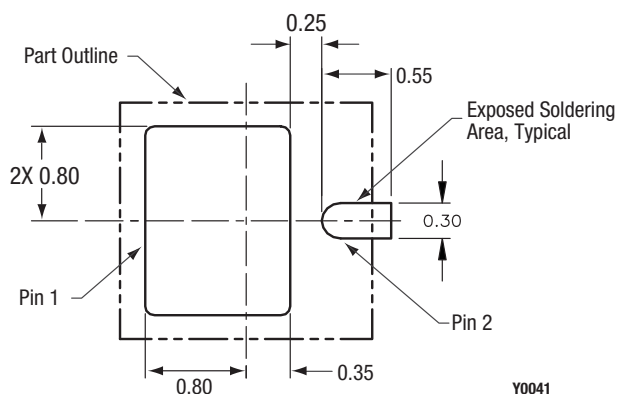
SMP1334-084LF PCB Layout Footprint (Top View)
